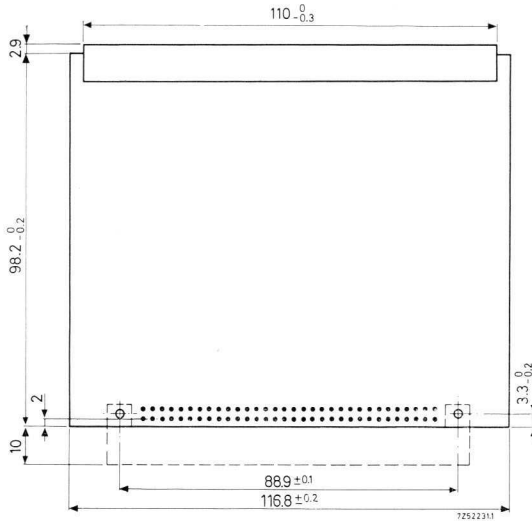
Dimensions of the printed wiring board to fit chassis type 4322 026 38250. Board thickness is 1.5 ± 0.2 mm.
